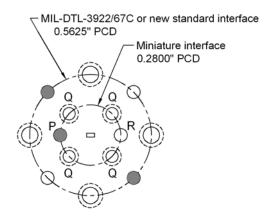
The Grammer miniature interface fits within the larger MIL-DTL-3922/67C pattern. Each side of the interface contains one captive pin (P) and a clearance hole (R) for the mating pin. The bolt holes (Q) can be either #2-56 or M2. Tolerancing for the miniature interface should follow that of the proposed larger interface.
